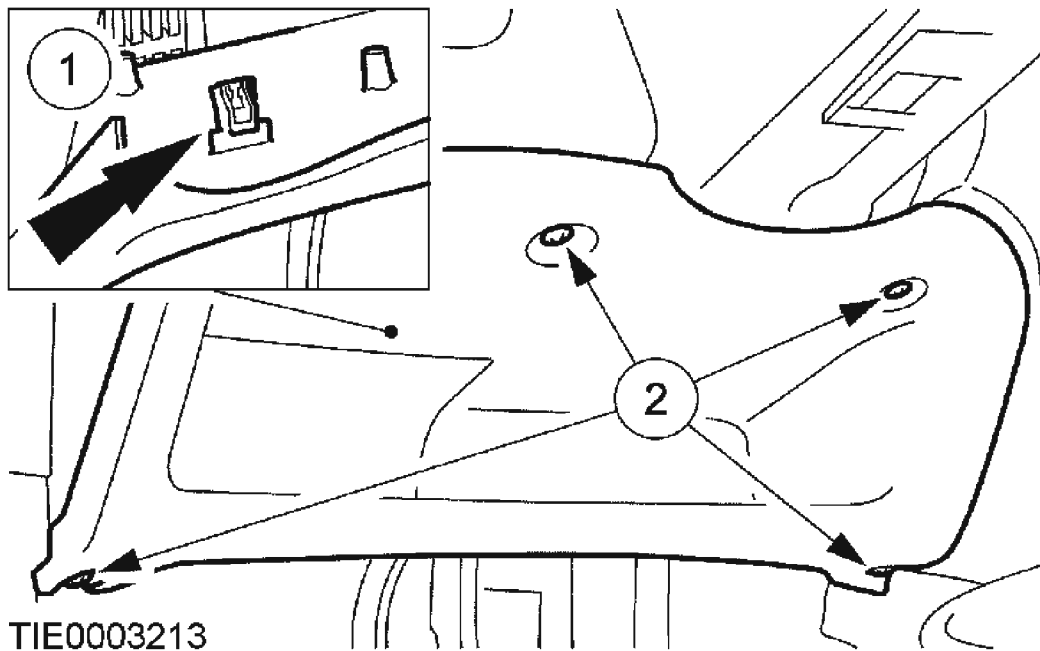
Attaching Instrument Panel Lower Knee Bolster To Instrument Panel
